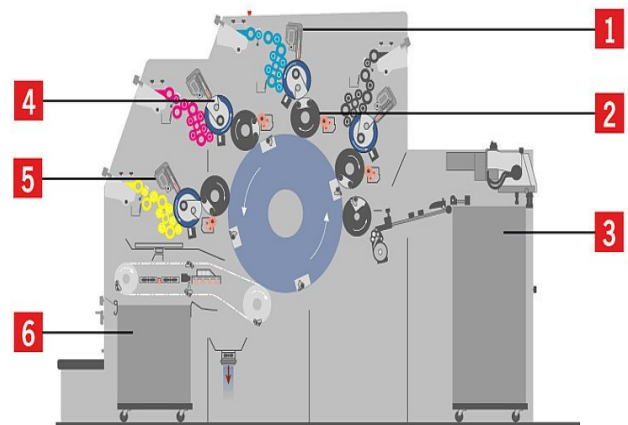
Heidelberg Quickmaster DI-46, sheet-fed digital offset printing machine (1-exposure system, 2-offset roller, 3- paper system, 4- plate cylinder, 5- inks system, 6-output device)
